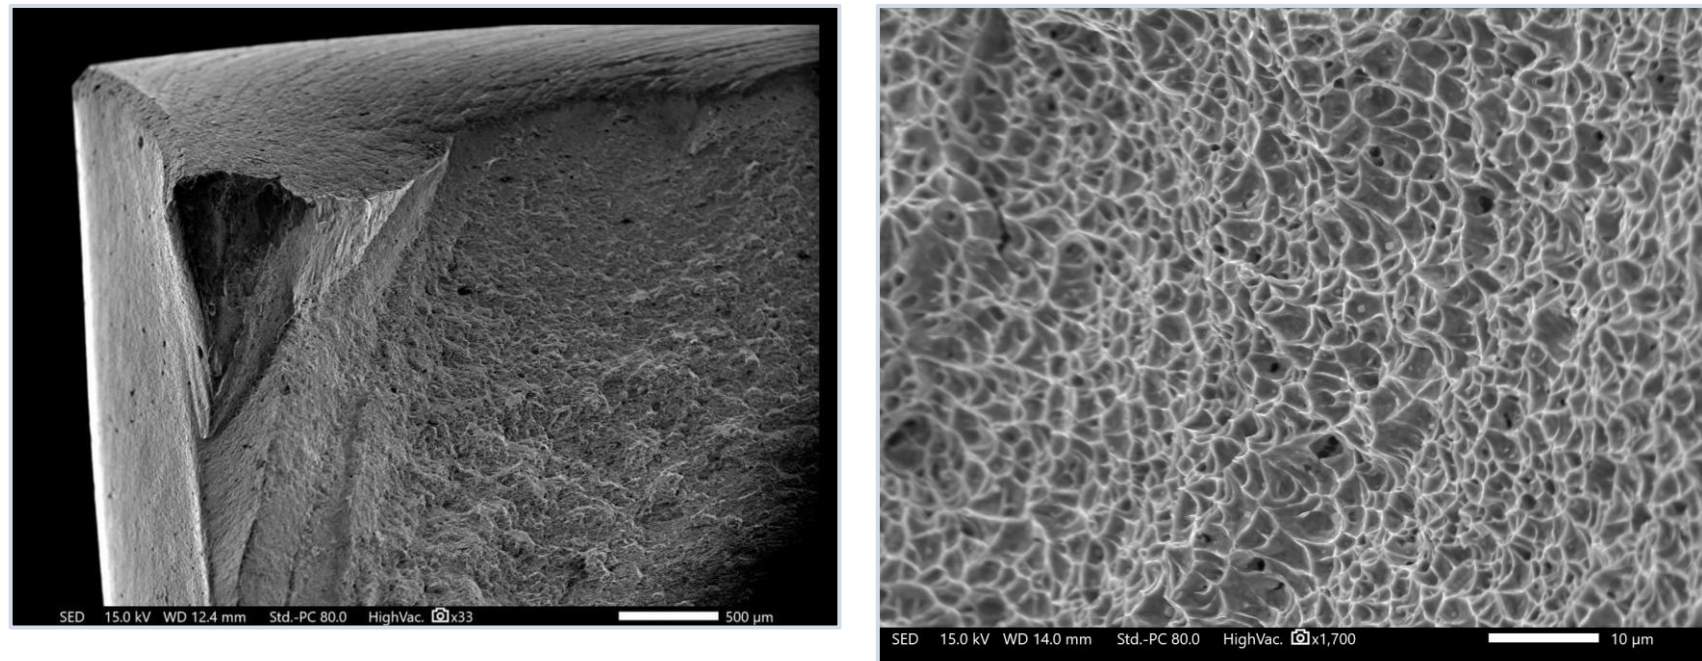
Cup-and-cone corner of the tensile fracture, 33× SED (500 μ m bar) — macroscopic ductile geometry. Fig. 6b Dimple field at 1 700× SED (10 μ m bar) — uniform microvoid coalescence.
